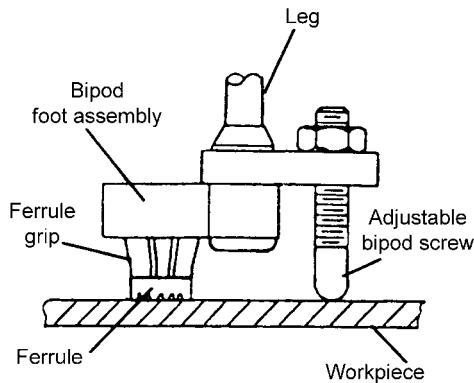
Use of an adjustable bipod foot assembly to provide three-point contact, ensuring perpendicularity of stud to workpiece
